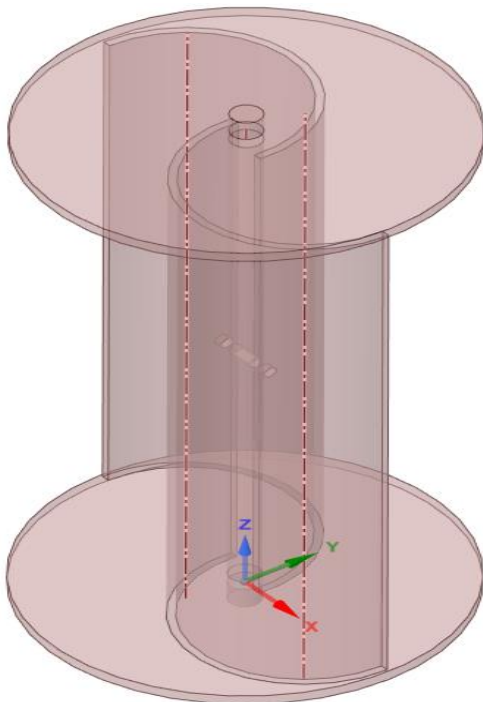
WEC's final rotor and blades ,designed in ANSYS 3D.
